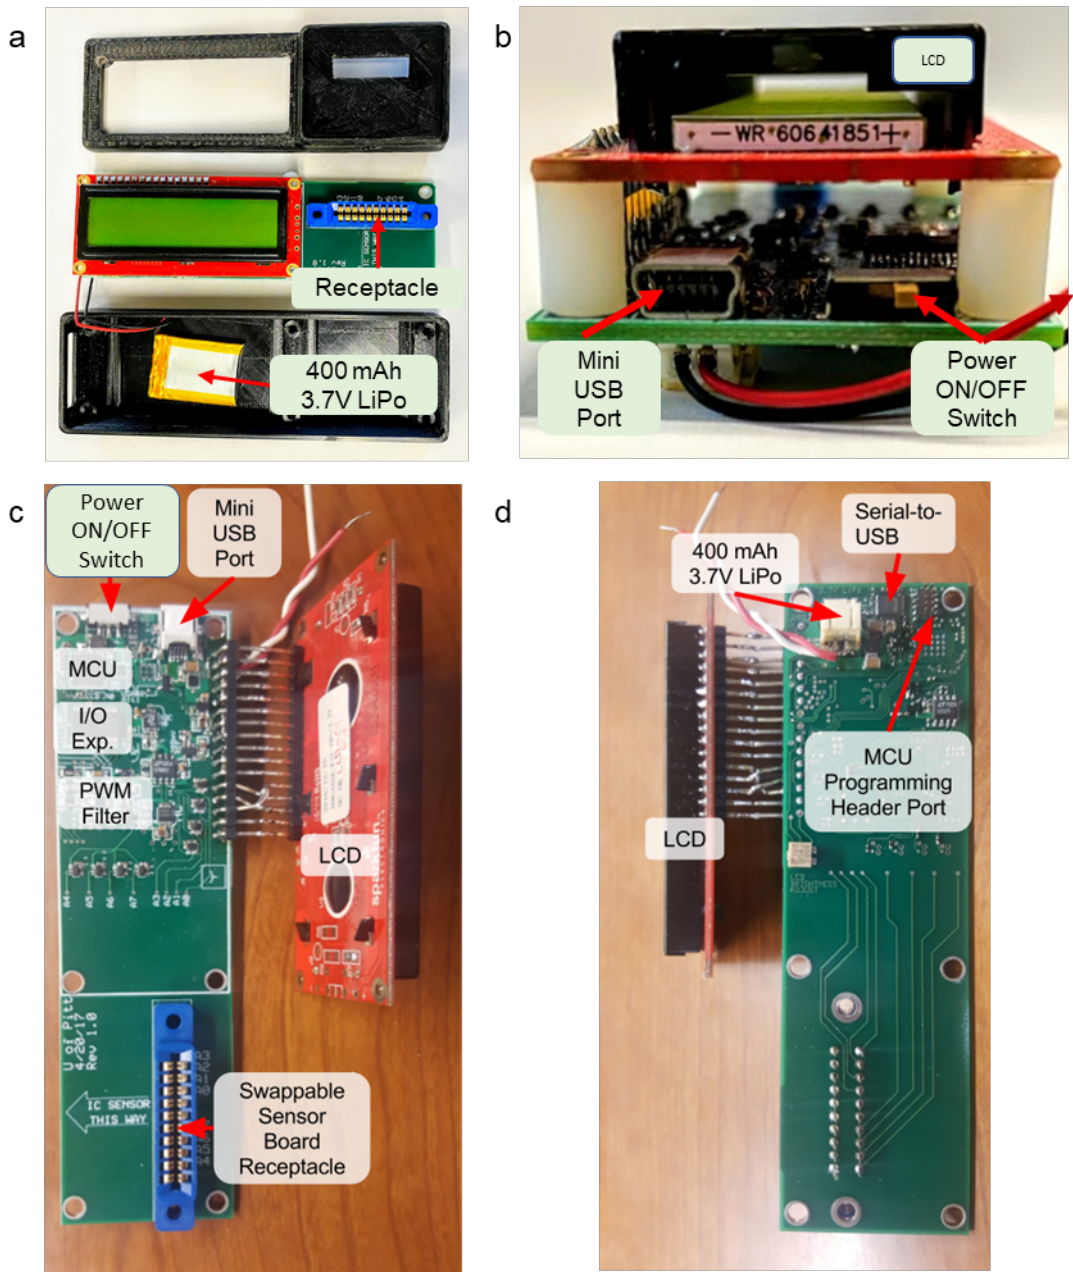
Prototype hardware. (a) Top down view of the prototype housing and the fully assembled circuit board. (b) Side view of the fully assembled circuit board. (c) Top down view of the circuit board below the LCD screen. (d) Bottom side view of the circuit board.
